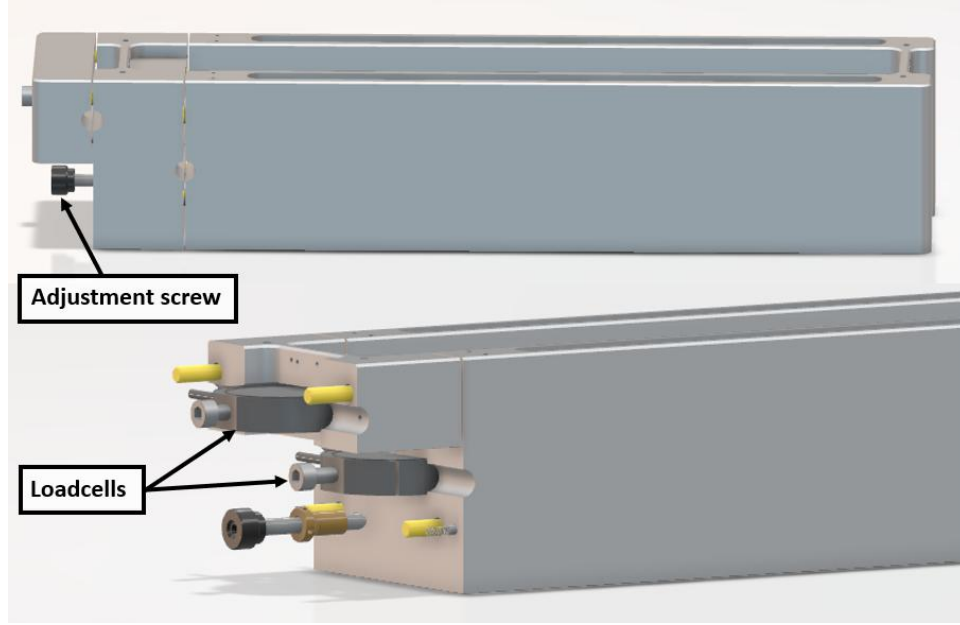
CAD drawing of the extendable ring frame. The upper image shows the complete assembly, while the lower image illustrates the structure with one part removed to reveal the installed load cells.
